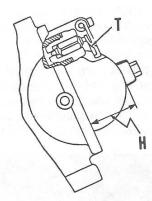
Tilt carburetor when measuring float height so tang (T) just touches inlet valve and valve spring is not compressed. Float height (H) should be 30.3-32.3 mm (1.19-1.27 in.). Bend tang (T) to adjust float height.
